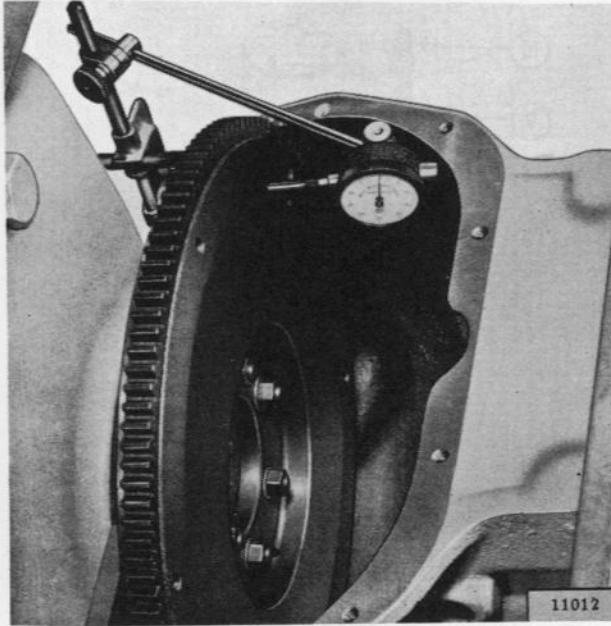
CHECKING FLYWHEEL RUN-OUT
